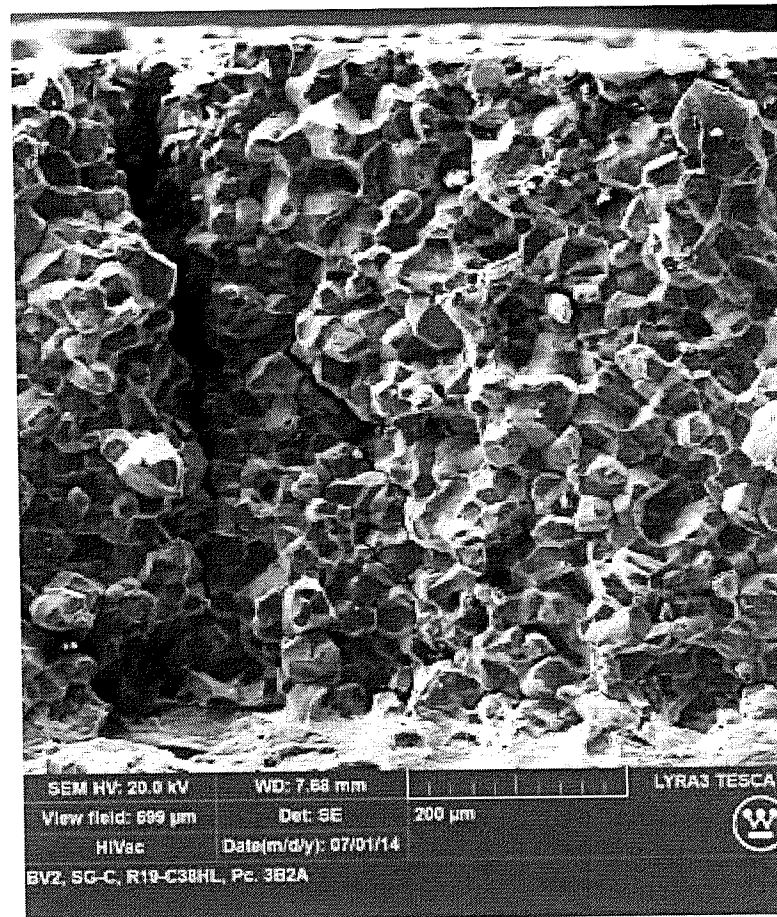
Example of R19C38-3B Burst Opening Fracture Surface (Center of Crack)
